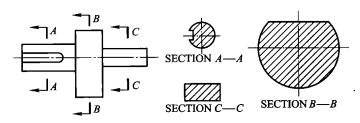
Sectioning Cut Symbols and Sectional Views
